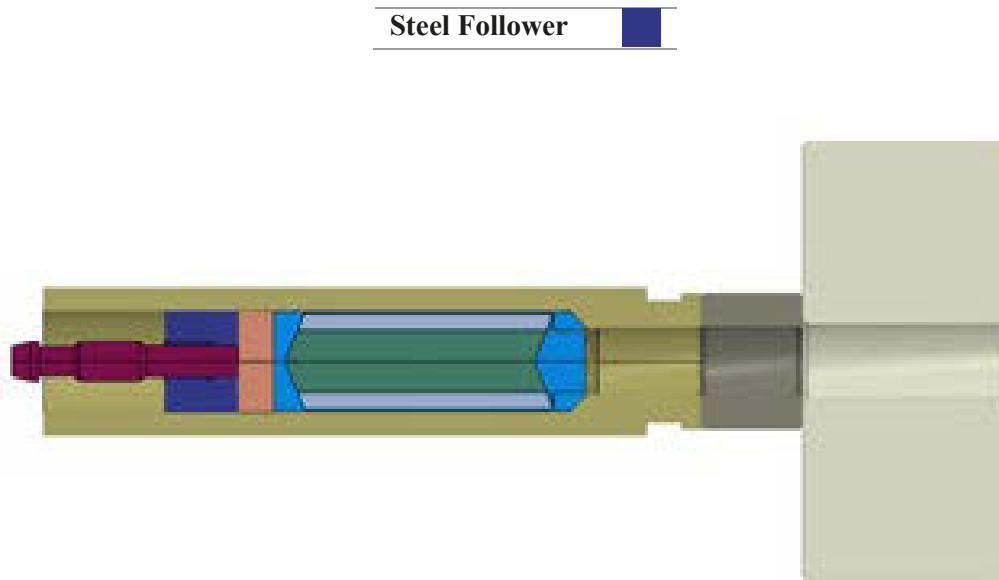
Long Billet with Clad Low Reduction Extrusion Assembly XZ Plane.
